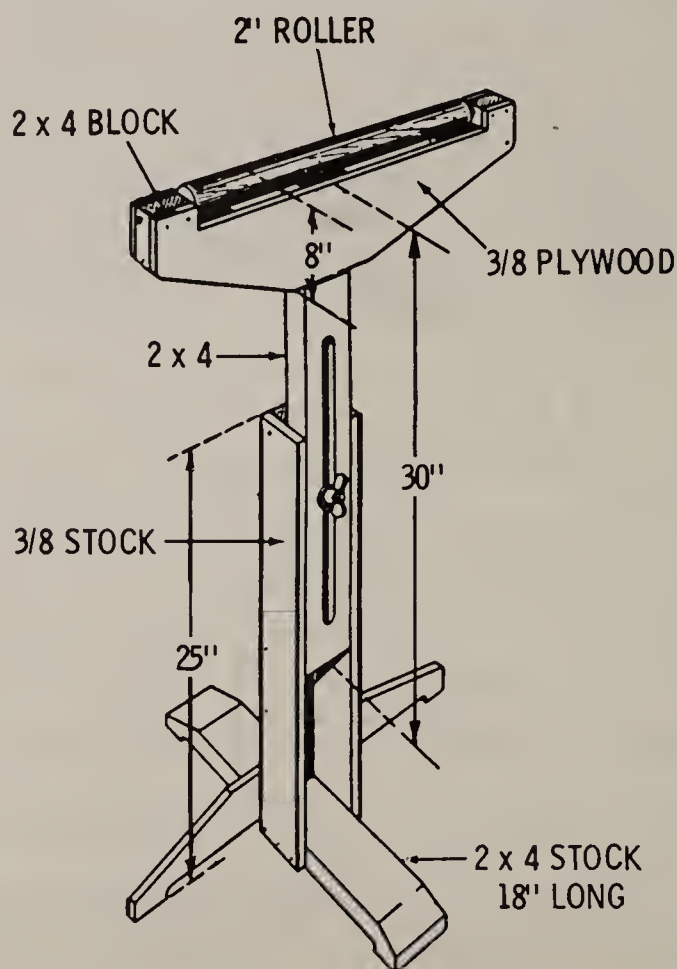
Typical table-extension support. A support of this sort, while primarily intended for support when ripping long pieces of stock, may also be used to advantage when crosscutting long pieces.
